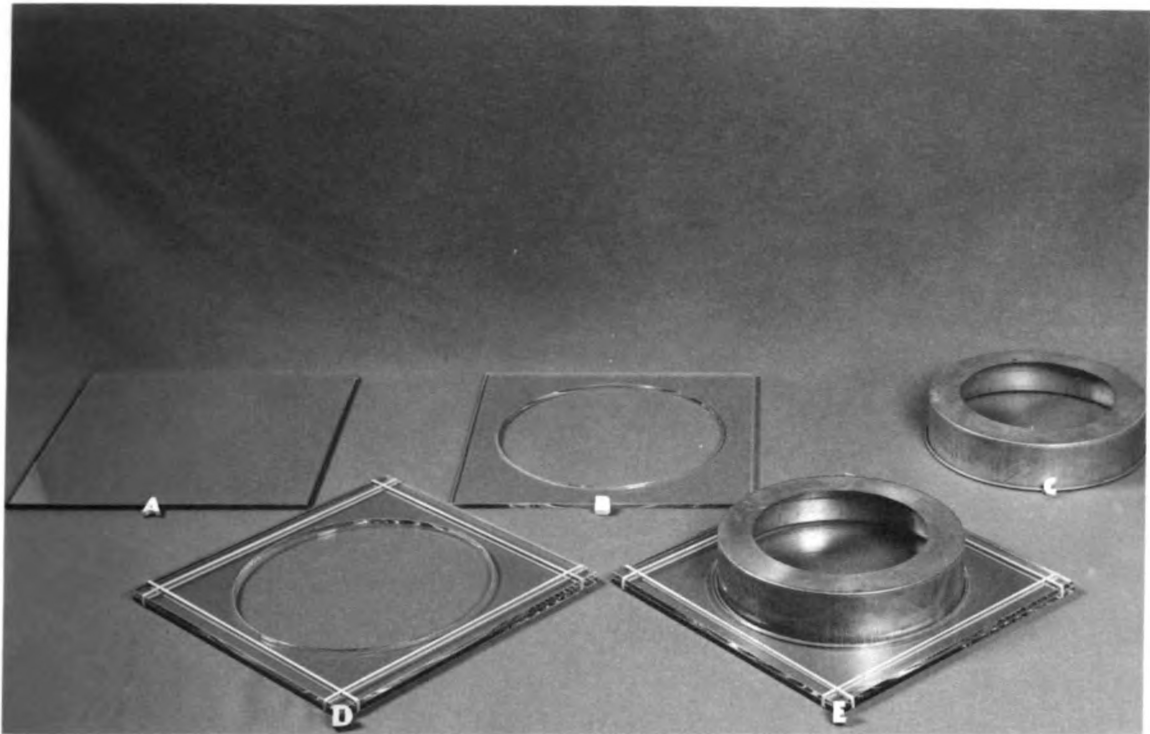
Molding equipment: individual parts, partial and complete assembly.
